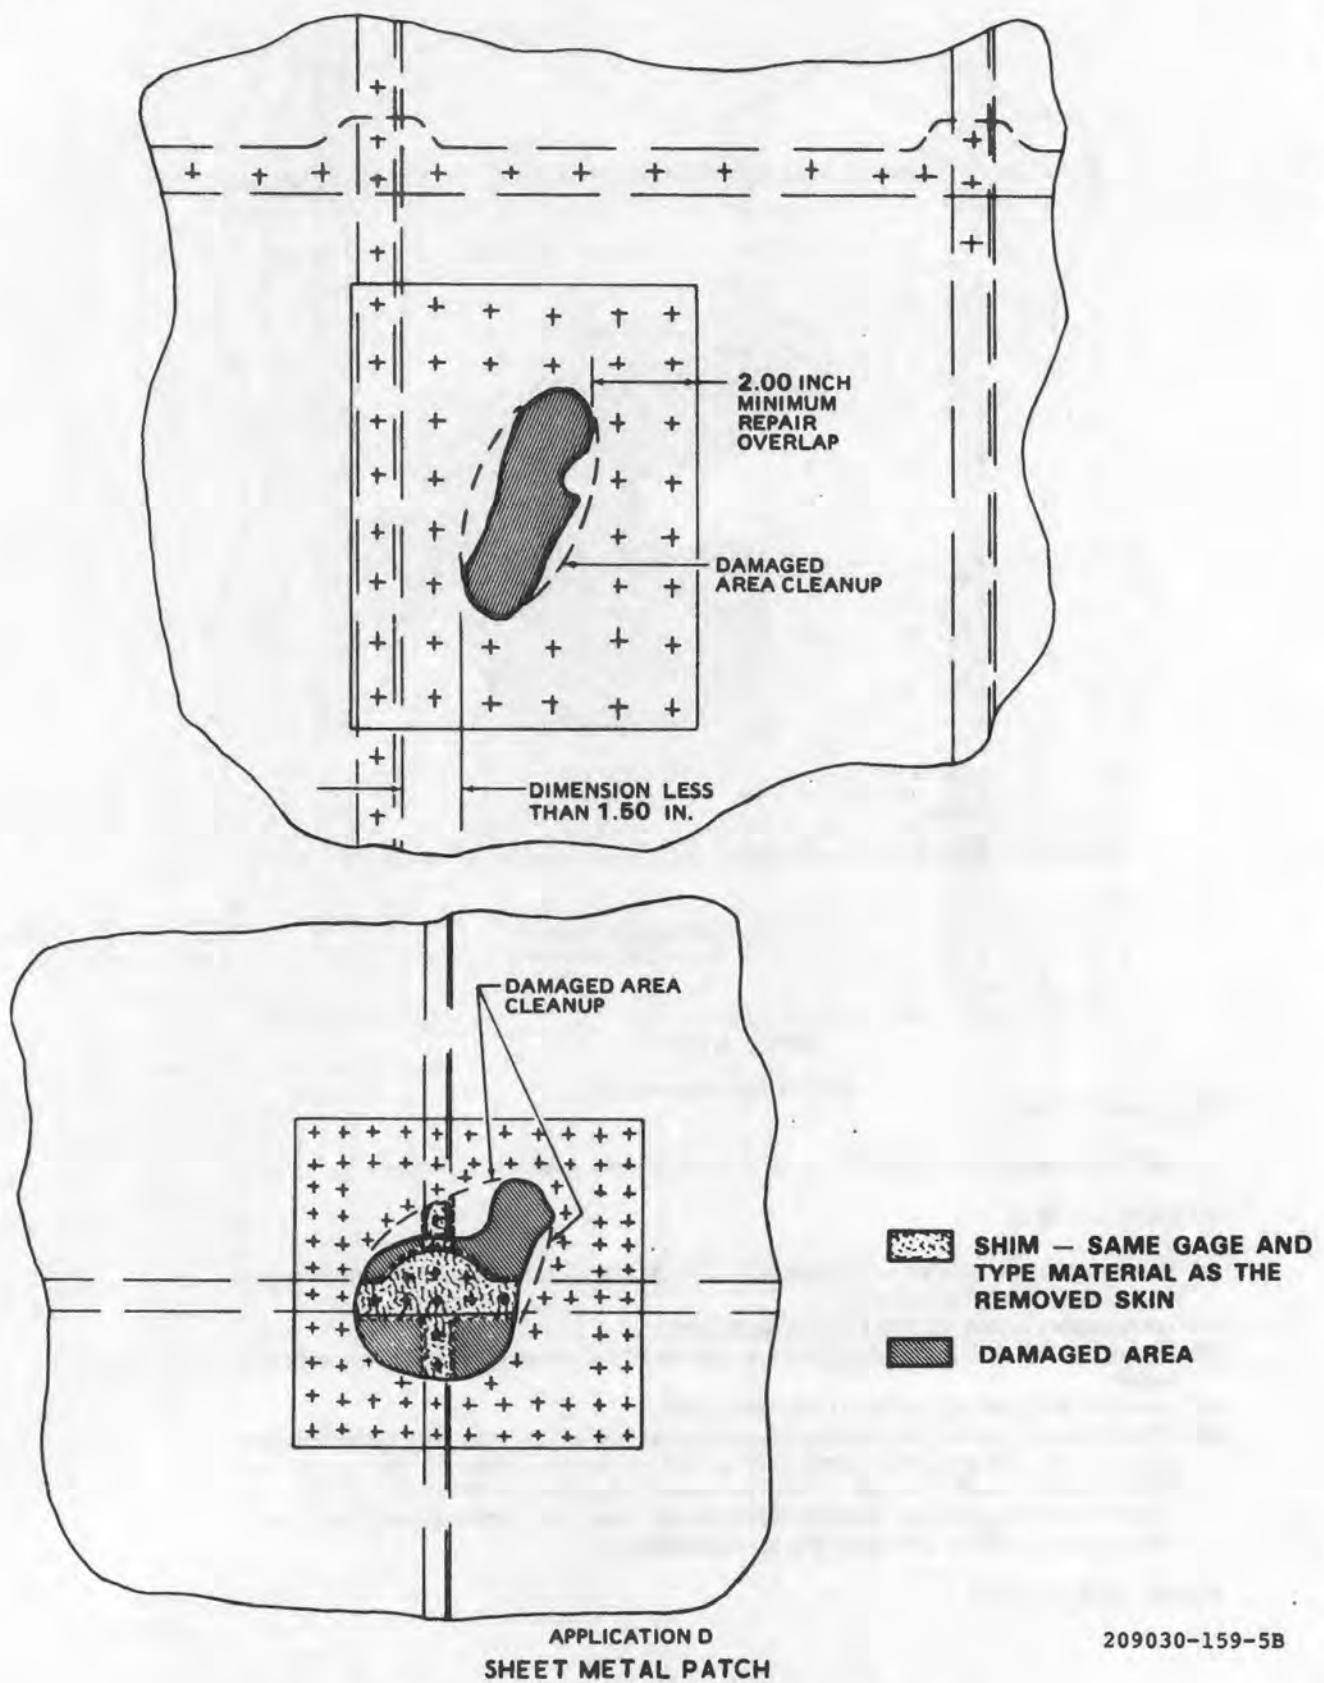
Sheet metal patch (Sheet 6 of 7)
